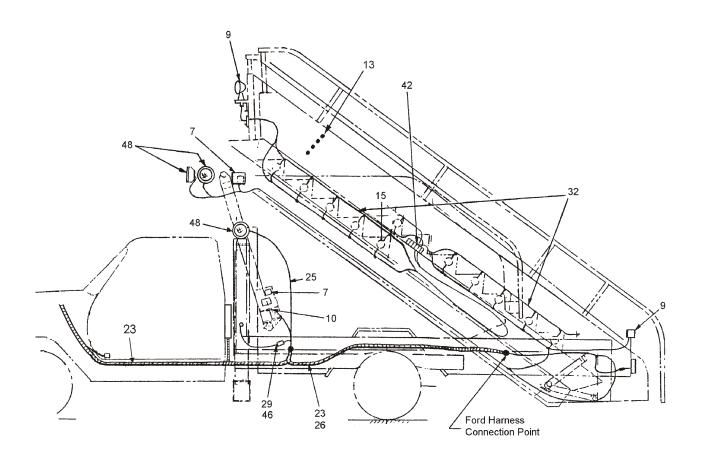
ELECTRICAL ASSEMBLY 1 OF 3
